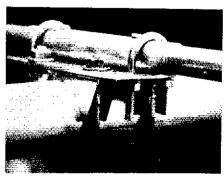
Photograph illustrating the elementto-boom clamp. Heavy-gauge scrap aluminum, U-boits and plated muffler clamps were used to make up the assembly.
